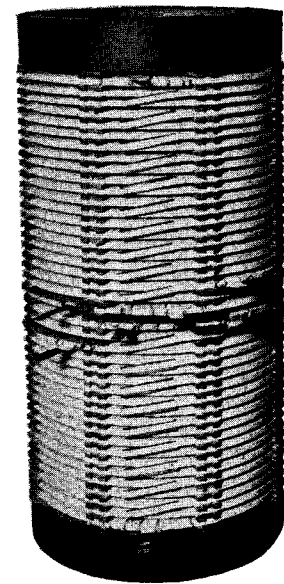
CONTINUOUS WOUND PANCAKE COIL WINDING
